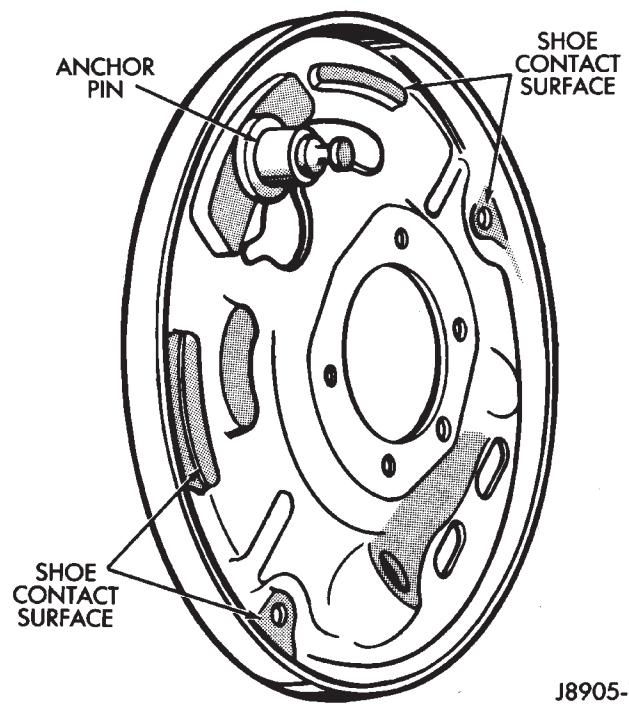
Shoe Contact Surfaces (10-Inch Support Plate)
